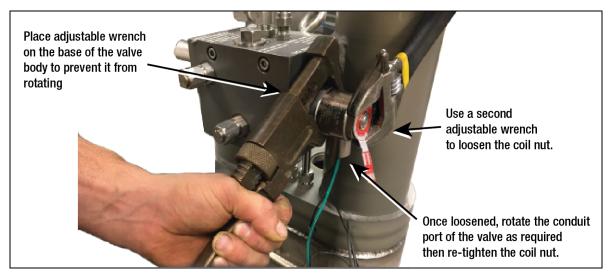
FC Loosening Inlet/Outlet Valve Conduit Connection
